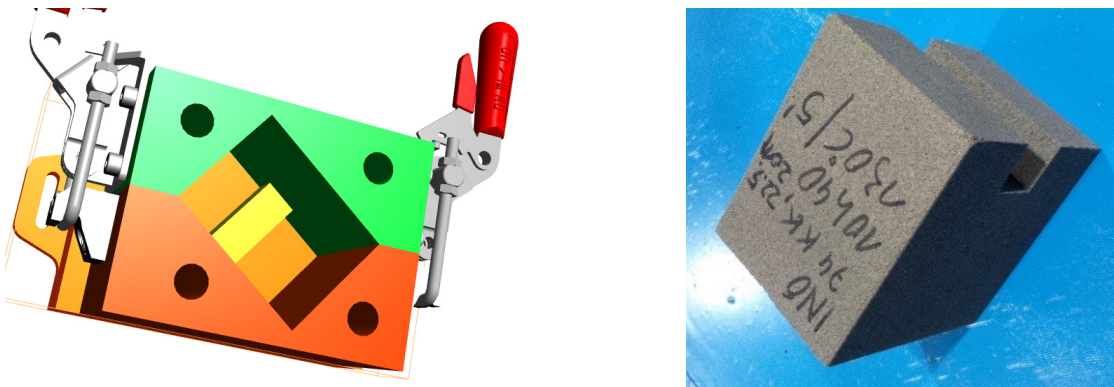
left: 3D design of the wedge split test sample core box in top view. On top of this tool is the blowing plate, which is part of the core blowing machine. Right: Sand core sample for wedge split testing.
